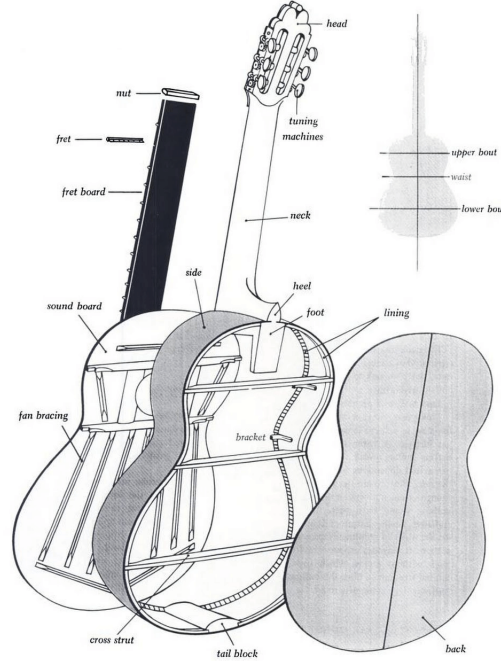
Exploded view of a guitar with its main components, from [3].
